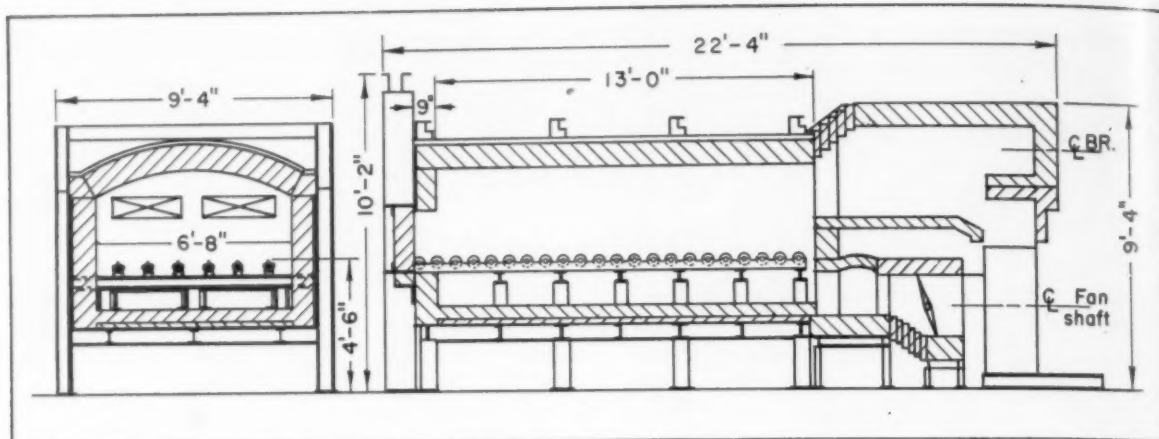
Schematic drawing showing the construction of the finish annealing furnace.
